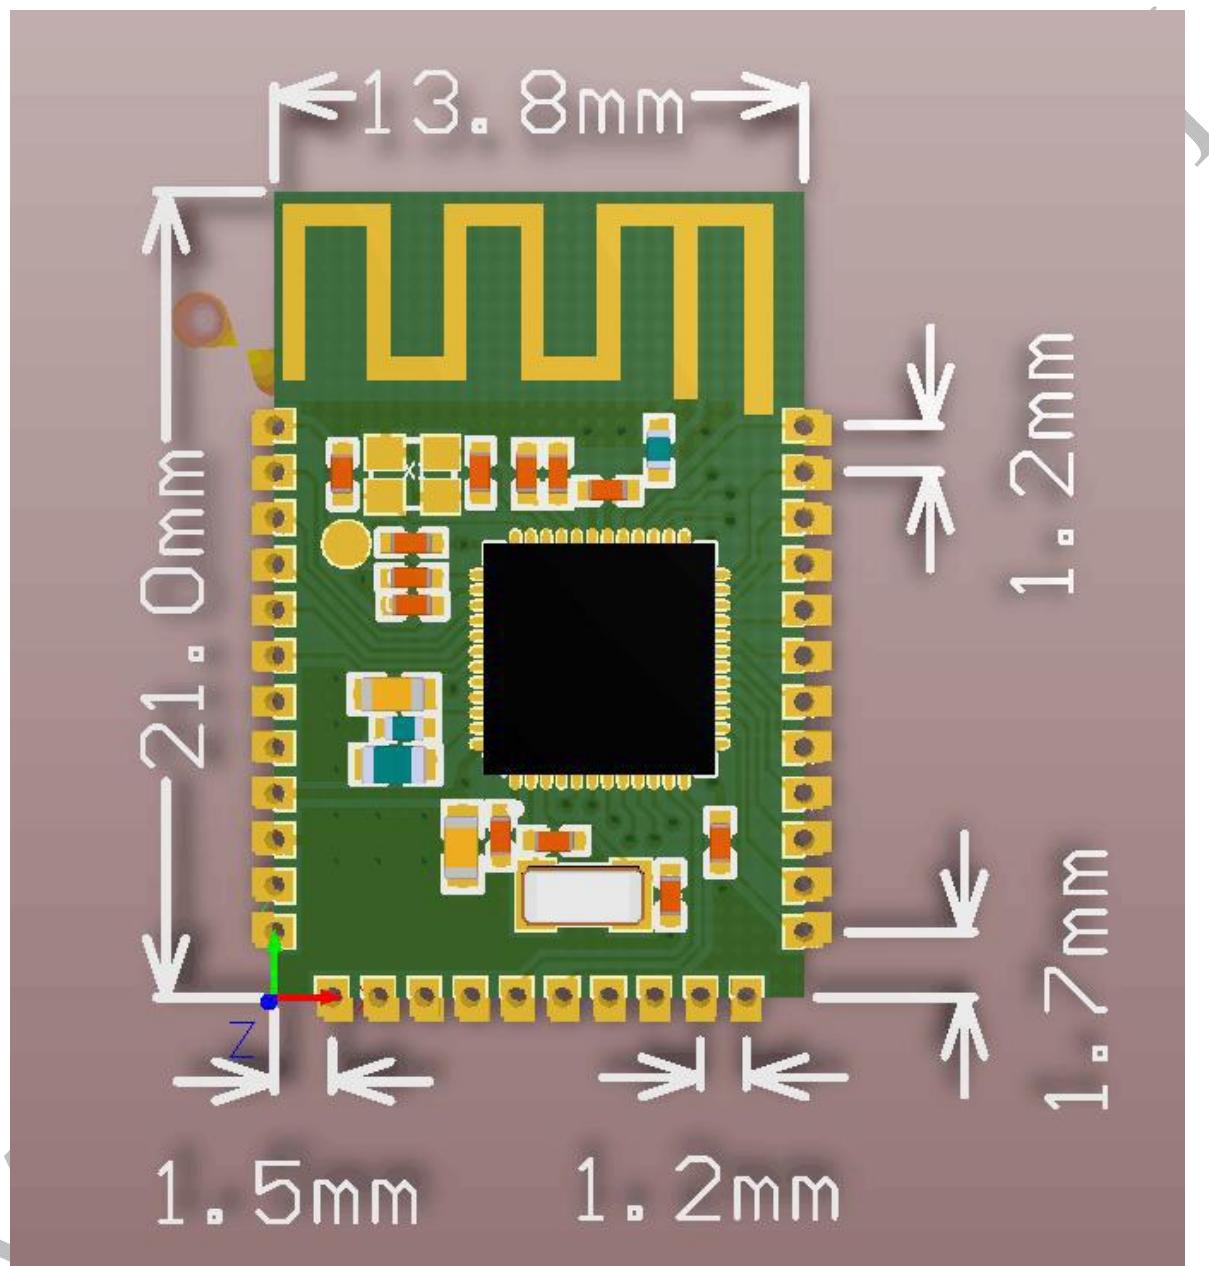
HZX-52832-S01A PCB Footprint and Dimensions
